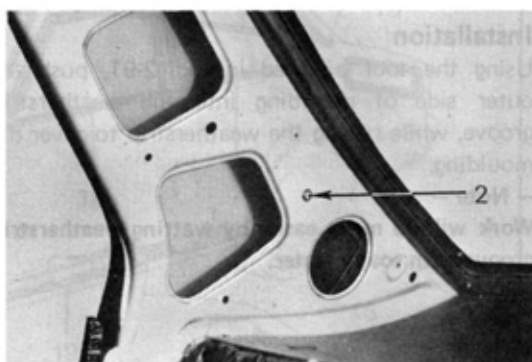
Roof Side Bent Louver & Duct Removal (1)
